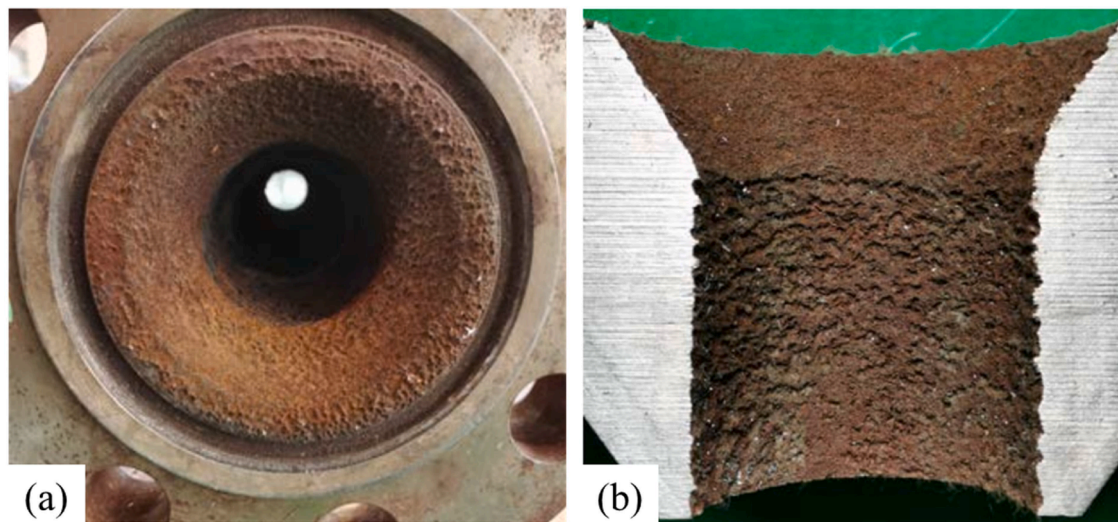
Macroscopic image of the corroded ASTM A105 flange; (a) corroded sealing groove and inner wall; (b) cross section of the corroded flange¹² (Ji et al., 2023).
